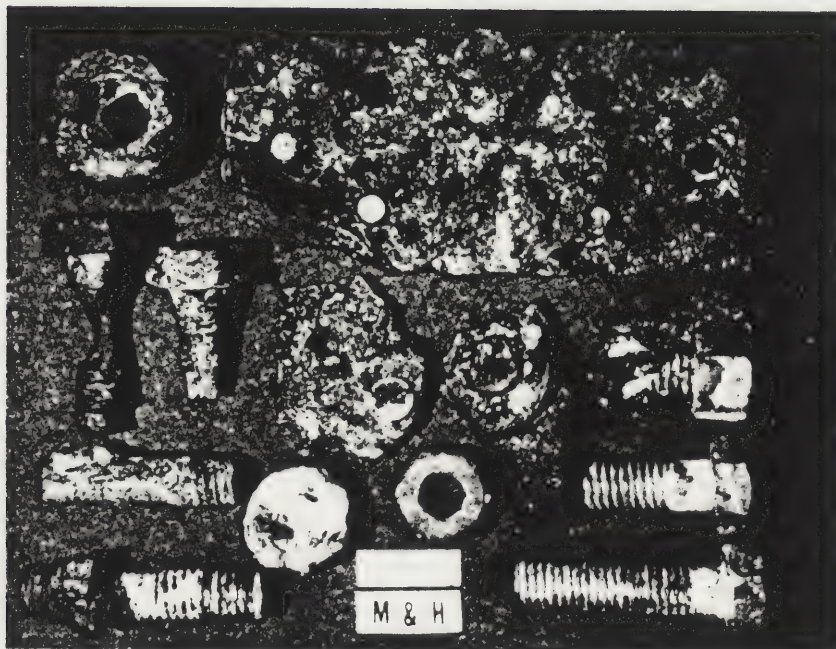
Collection of corroded pieces removed from Music and Harvest.
